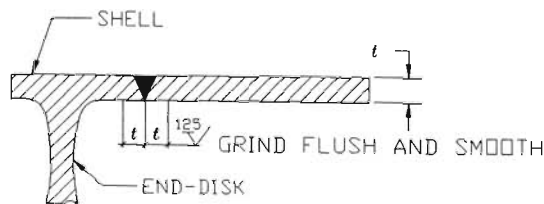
FINISH CRITERIA OF SHELL CIRCUMFERENTIAL WELD
